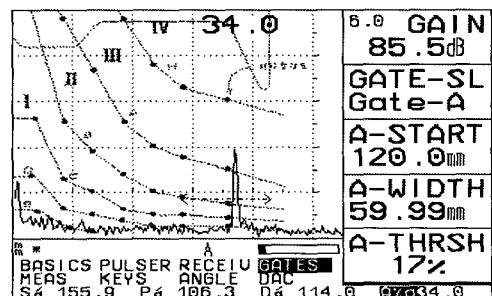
Ultrasonics signal of rail weld zone(flange part)
